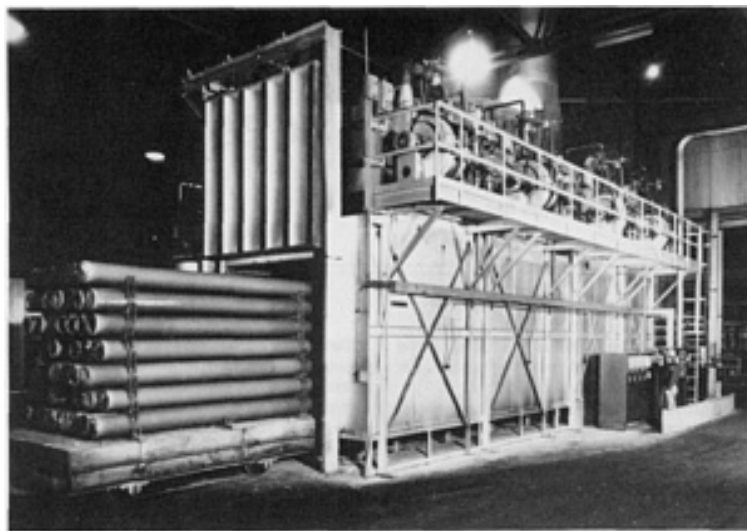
Car-bottom batch furnace for homogenizing large cylindrical parts. Courtesy of Despatch Industries, Inc.
